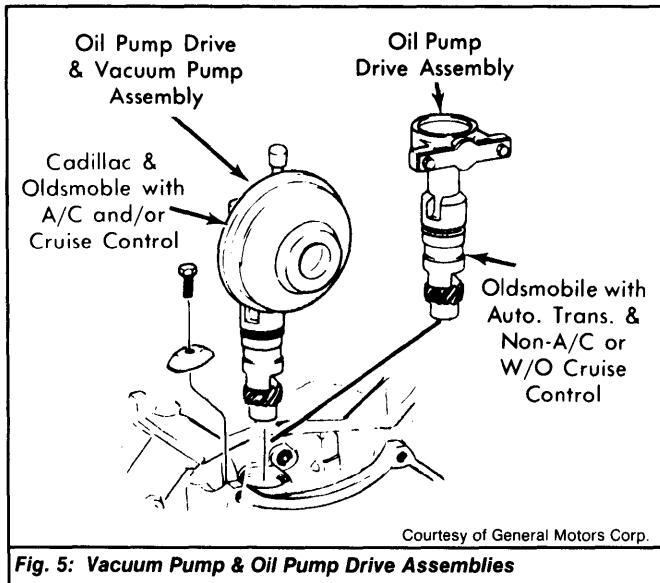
Vacuum Pump & Oil Pump Drive Assemblies
